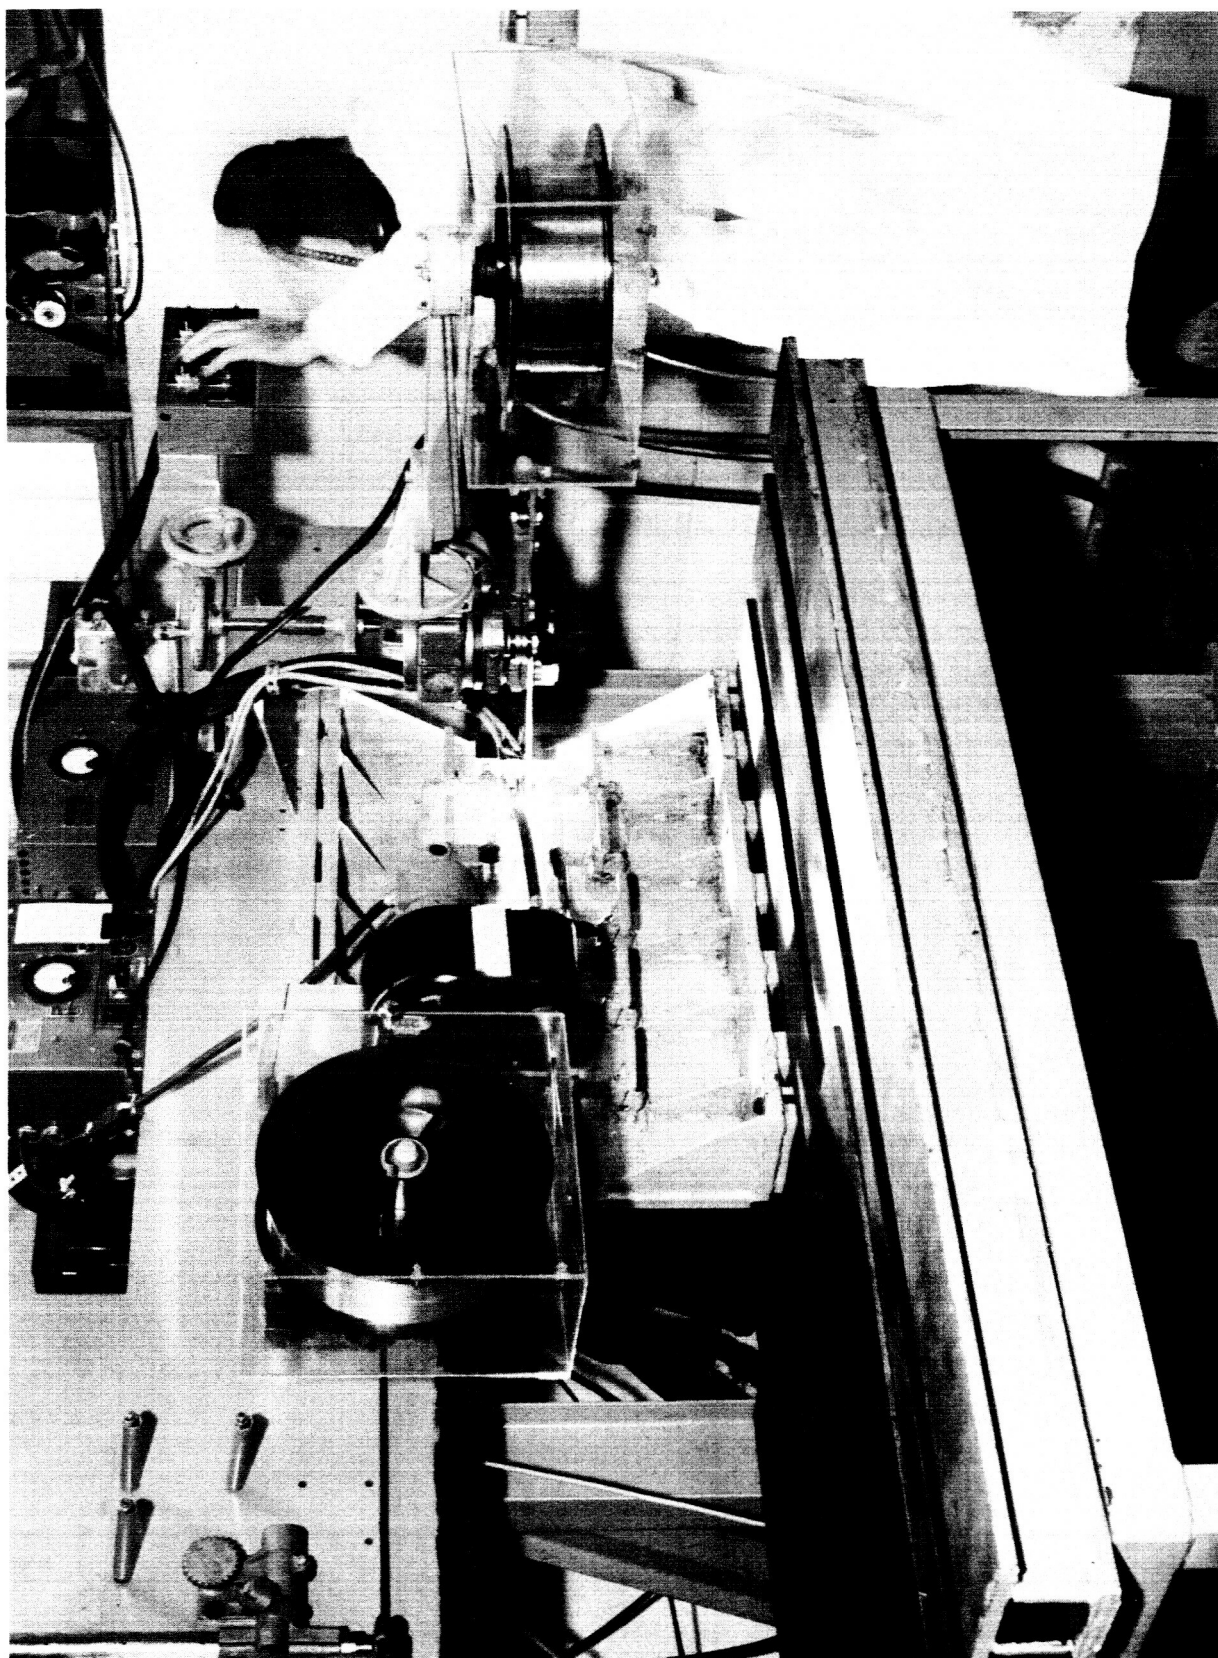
MIG WELDING EQUIPMENT SET UP IN HORIZONTAL POSITION. Note cold wire feed attachments.
